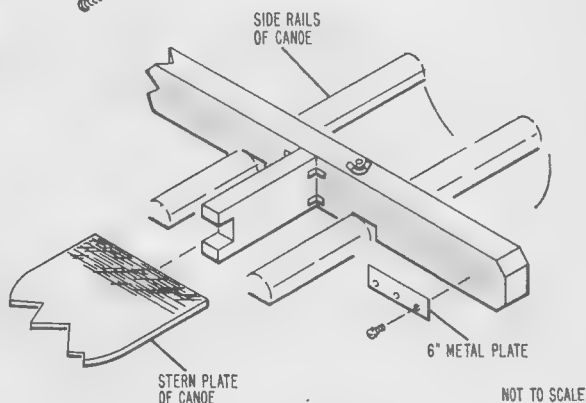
As shown two corner braces will secure the brace to the cross-member.
